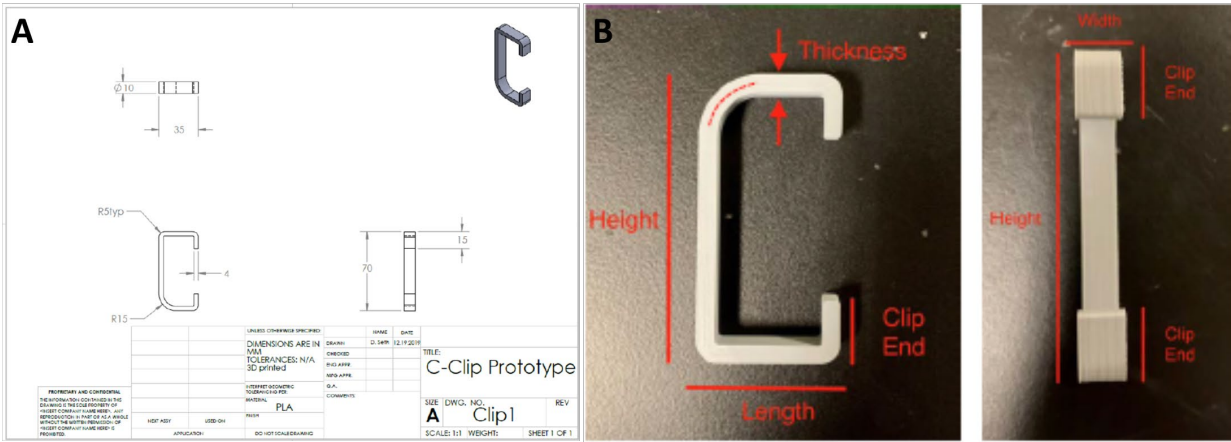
(A) Engineering drawing of the initial c-shape provided to the students. (B) Measurements made on the printed c-shapes to determine the dimensional accuracy of the 3D printers
